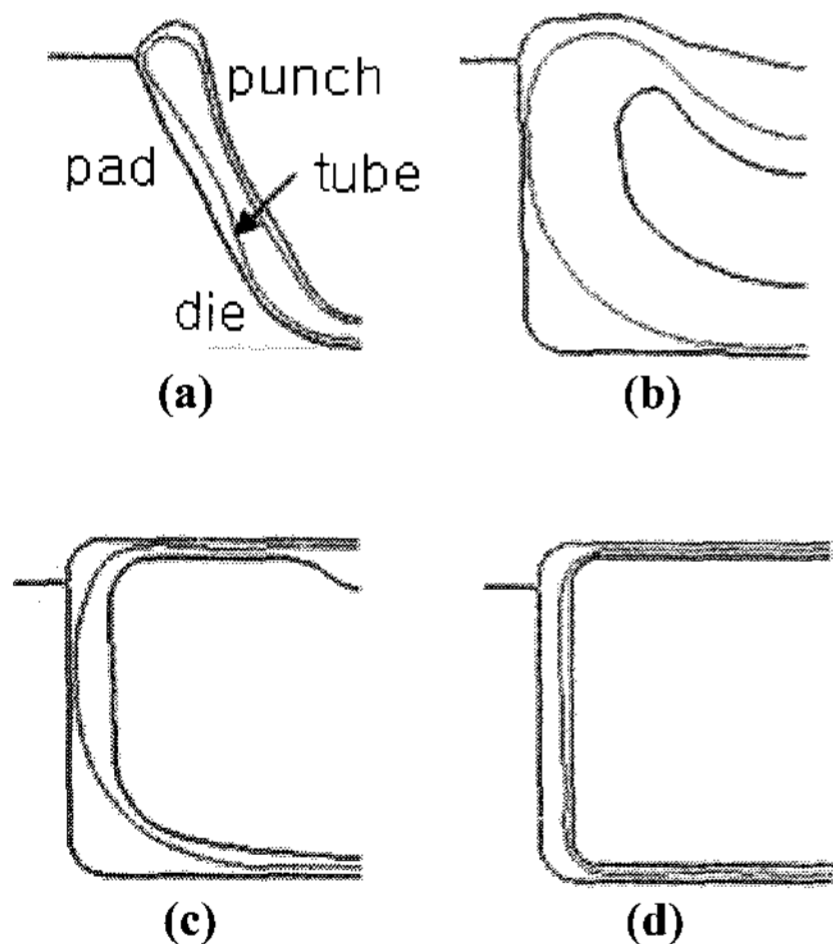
Shape of cross sections of tools and the tube with the modified design: at sections (a) E-E'; (b) F-F'; (c) G-G'; (d) H-H'
